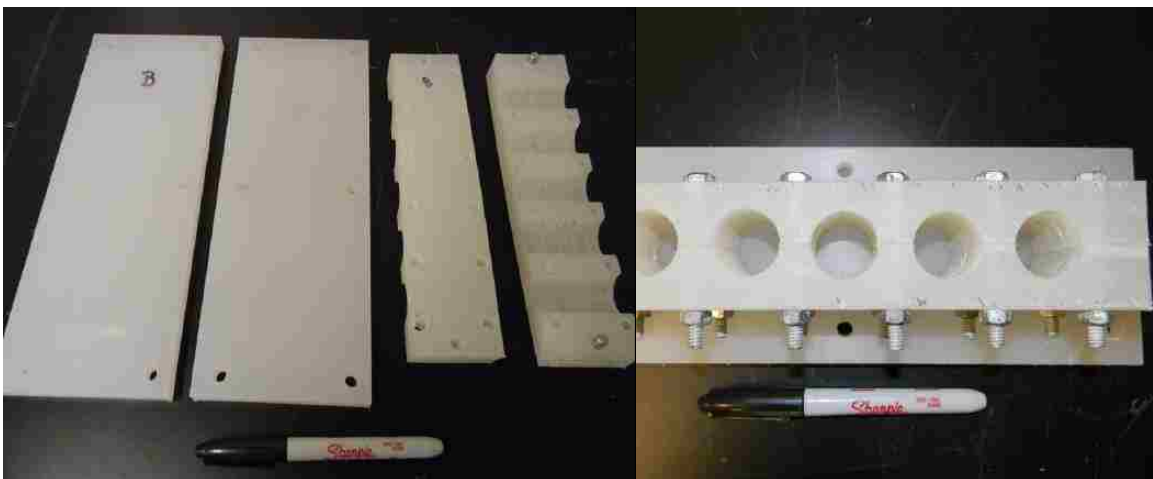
Fabricated specimen molds (1" diameter, 2" depth)
